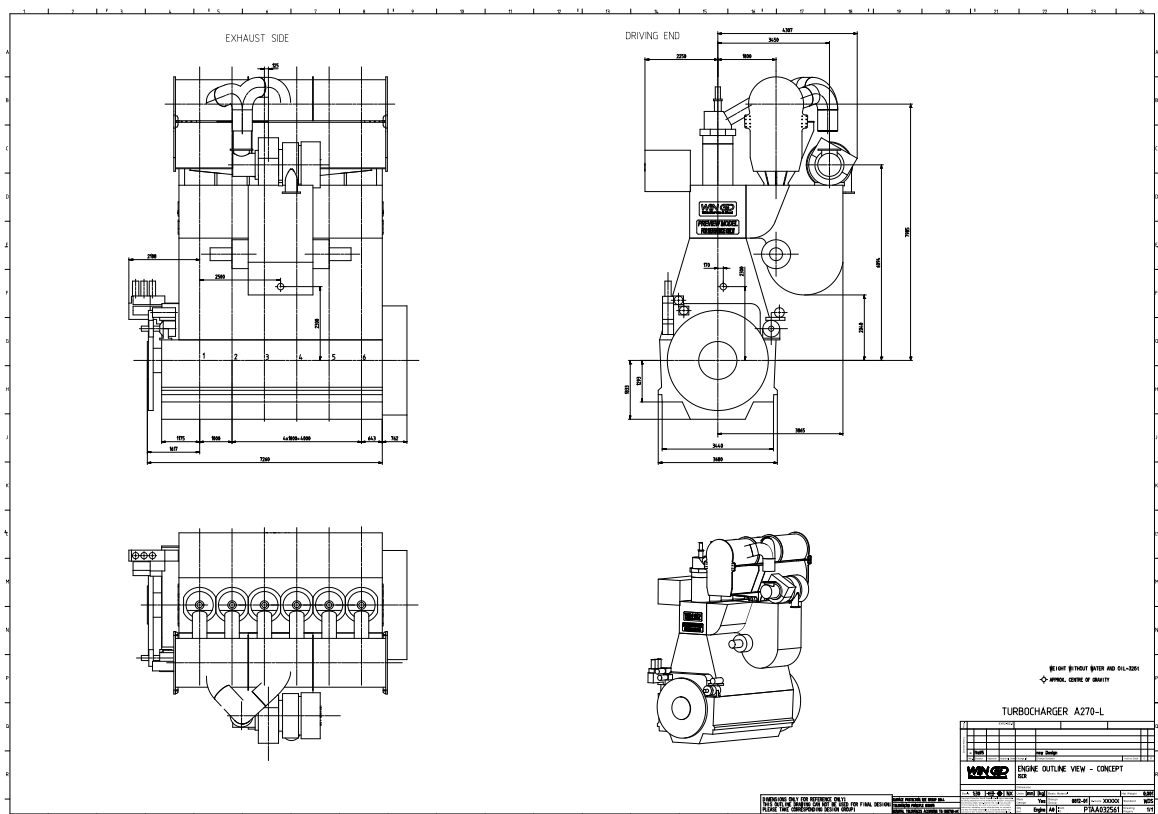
Example drawing of a new Engine Outline View – Concept (DG 0812-01) for a 6X62-S2.0 engine (A270-L, iSCR)
